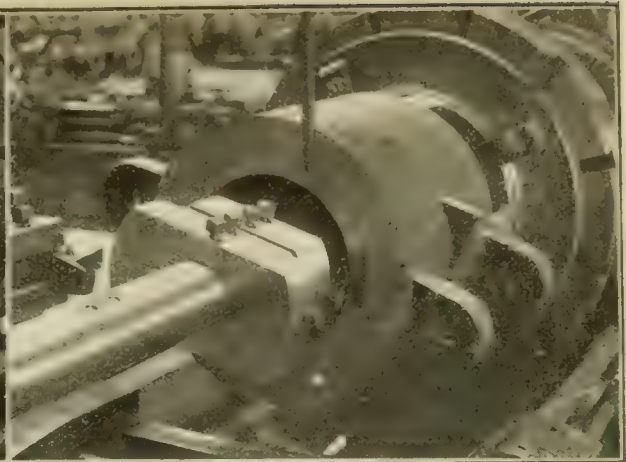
NOTE THAT THE CASTING IS CLAMPED IN POSITION ON THE CHUCK PLATE.
